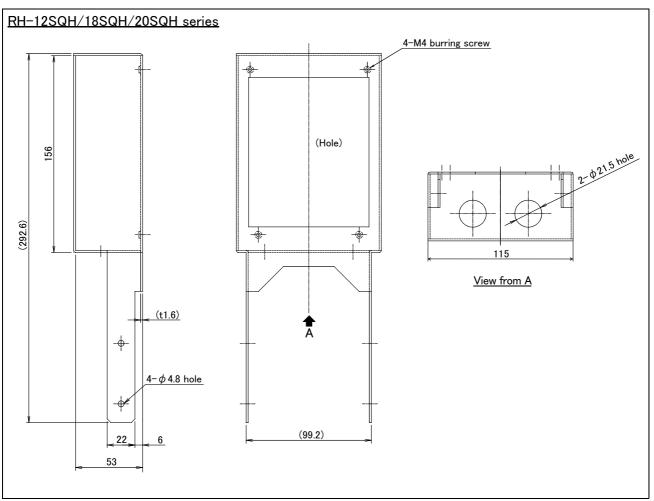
Outside dimensions of solenoid valve box (RH-12SQH/18SQH/20SQH series)
